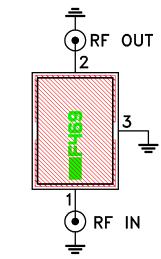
DETAIL "A". SOLDER MASK IS NOT SHOWN FOR CLARITY
